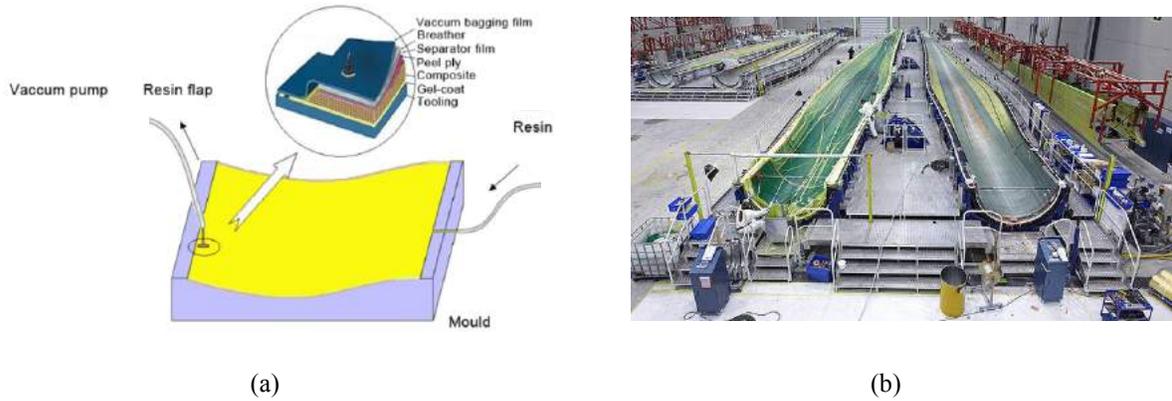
(a) Coated mould area and tooling materials used [9], (b) resin infusion process of a wind turbine blade from [7]
